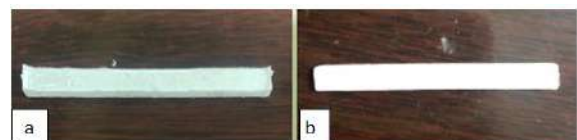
show compacts specimens for fracture test (a) before sintering, (b) after sintering with surface finishing (grinding and polishing)
